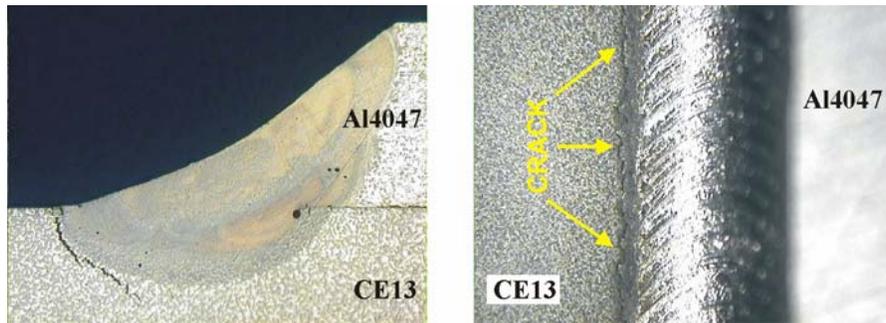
Cross section of an un-optimized seam weld indicating the location of crack, that occurs outside of the weld in the heat affected zone of the Al-Si. A top view of the weld shows the crack clearly running the length of the seam
